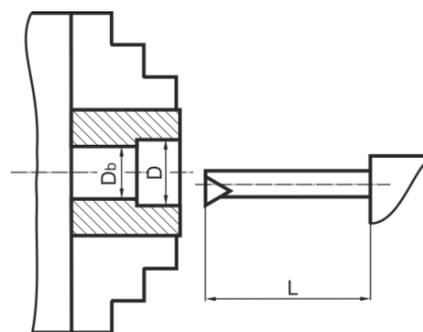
Experimental scheme (D_b – diameter of the workpiece; D – diameter of the machine part)
